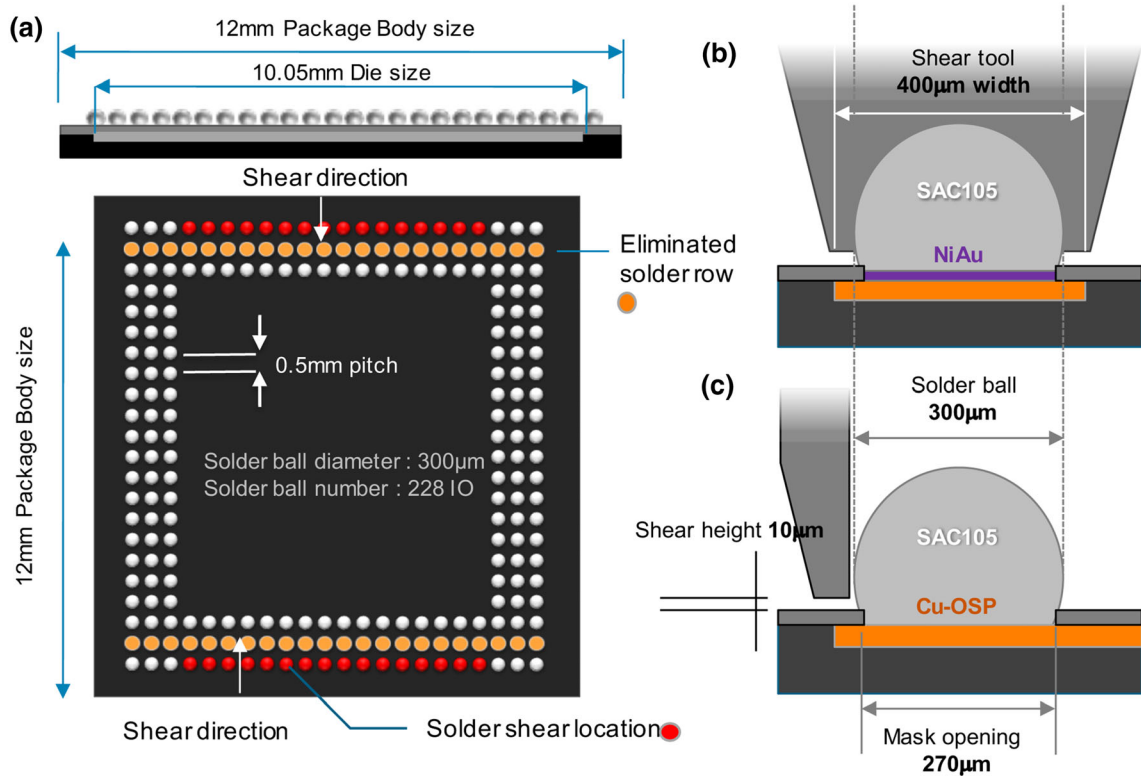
Ball grid array (BGA) test component configuration. (a) Solder joint arrangement top-down view, (b) NiAu surface finish solder joint configuration and shear tool dimension front view and (c) Cu-OSP surface finish solder joint configuration side view.
